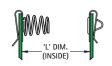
Spring-Button L dimensions reflect initial insertion deflection.
